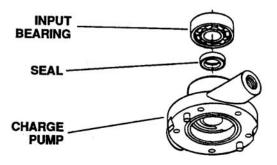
Removing Bearing and Oil Seal From Charge Pump
